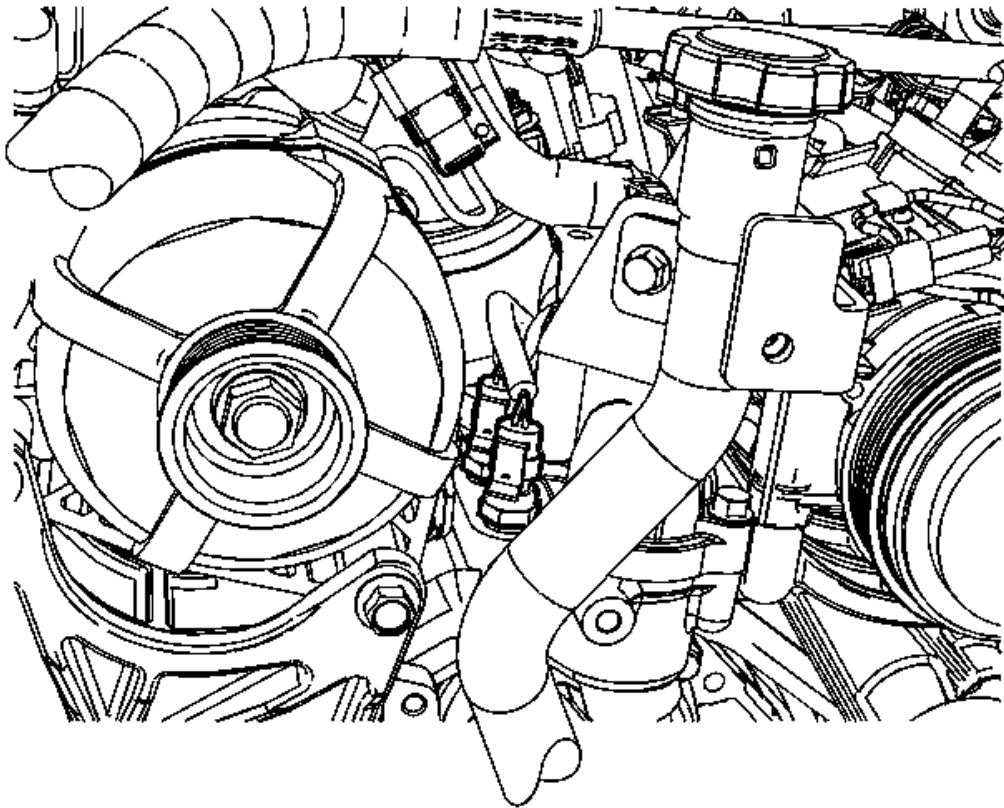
View Of Wiring Harness Bracket & Bolts
